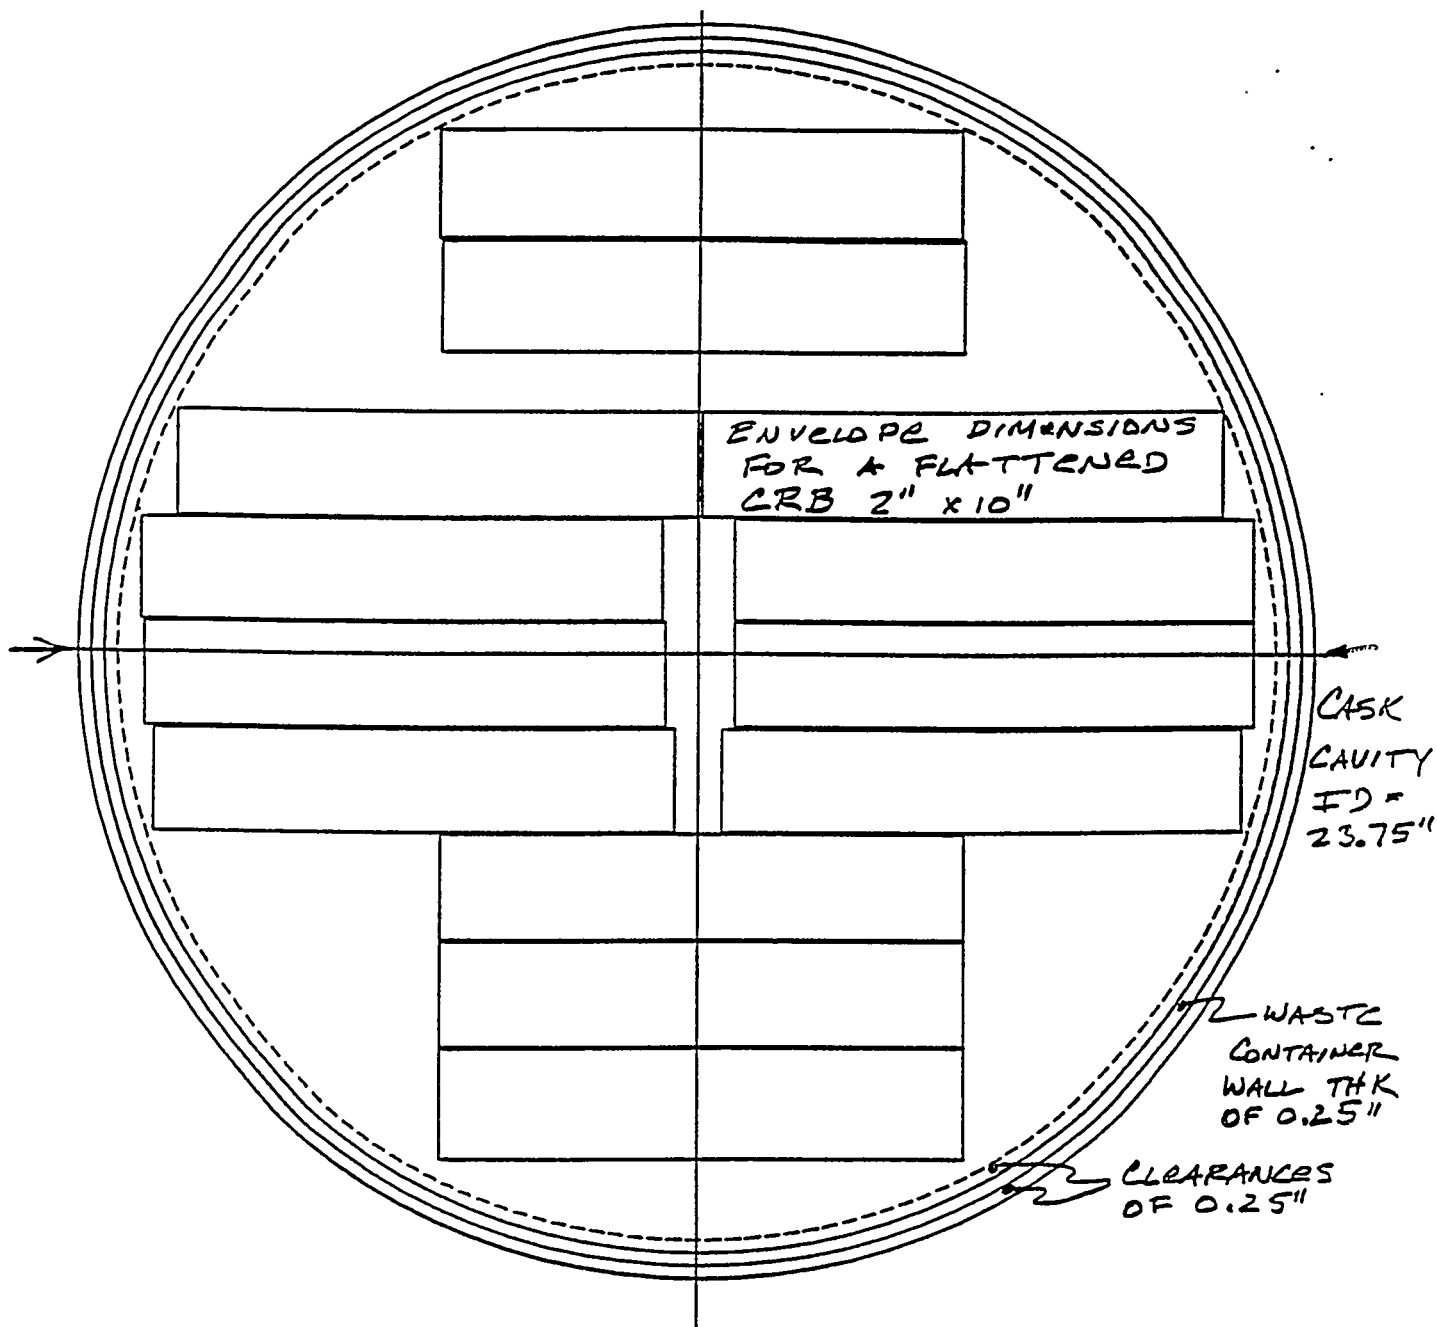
Arrangement of BWR control rod blades in a cylindrical cross section waste container.
